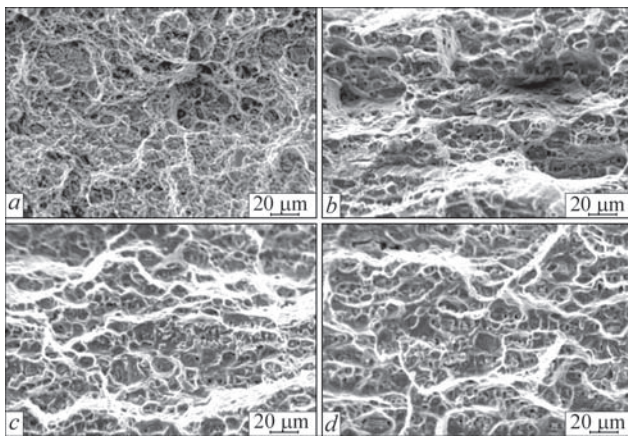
Microfractographs of fractures of samples failing in different joint zones: *a* — weld; *b* — TMIZ; *c* — boundary of the zones of thermomechanical impact and heat-affected zone; *d* — HAZ
